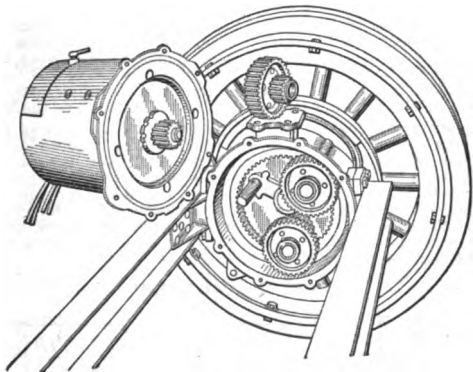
Concentric gear drive. (Commercial Truck Company.)
